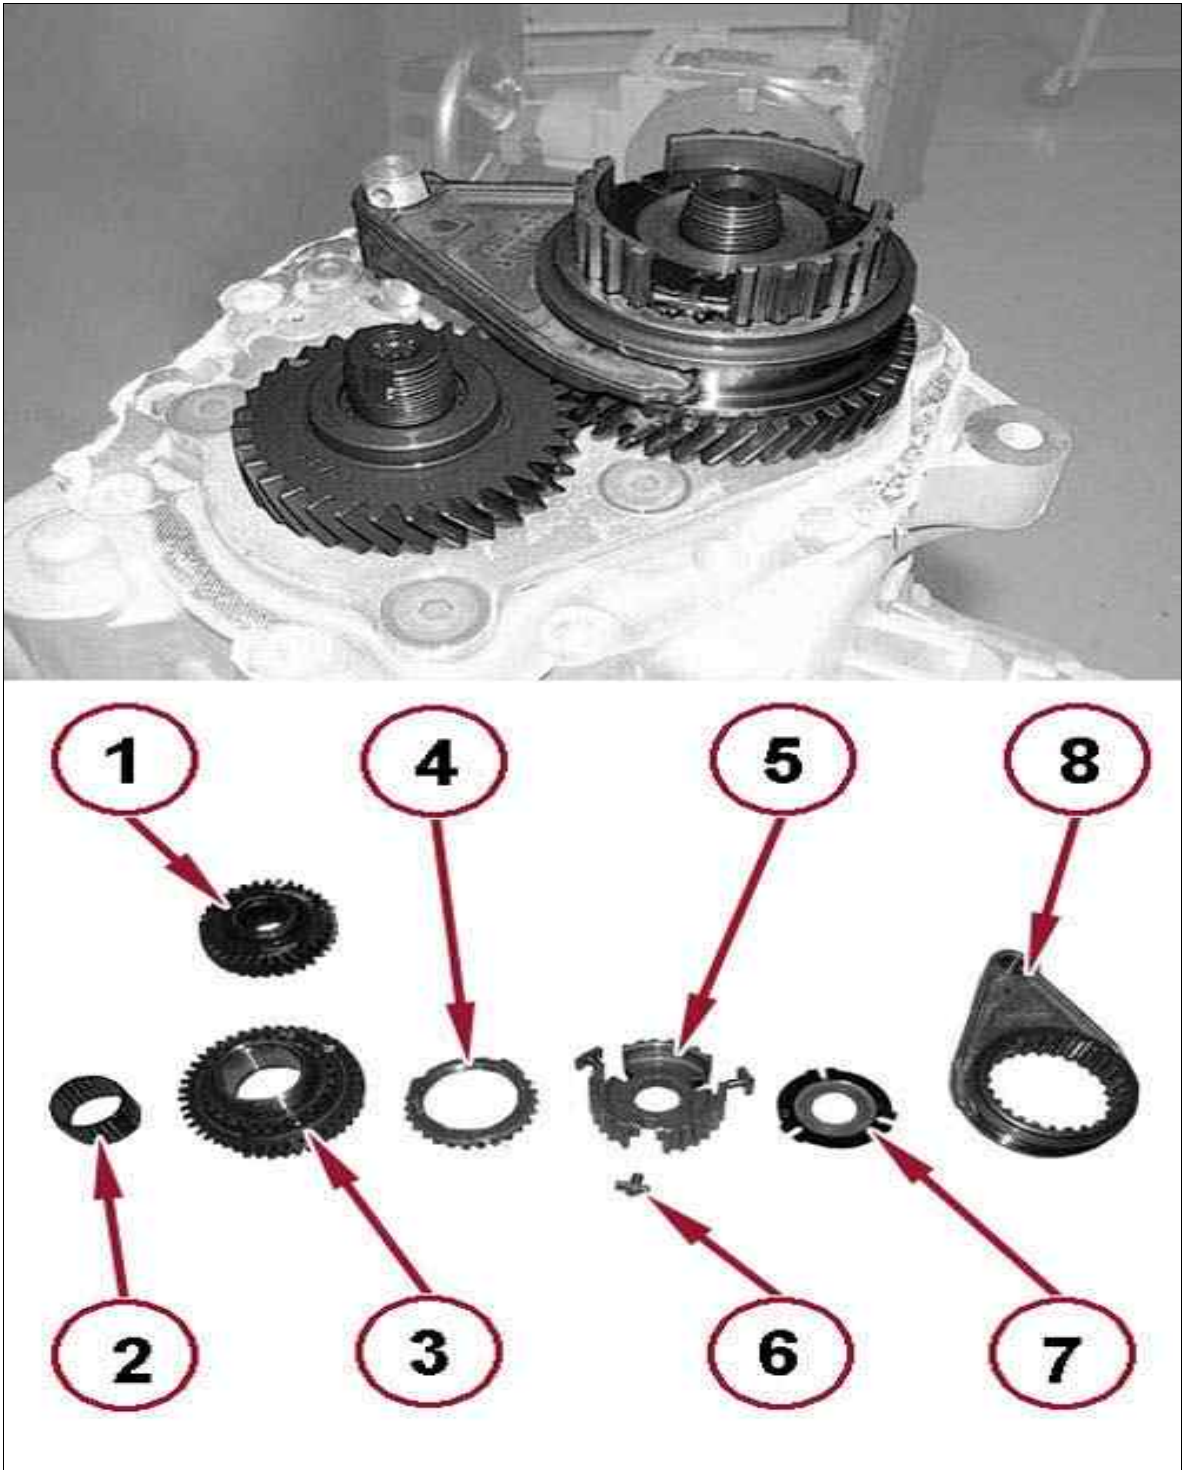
5th Gear Synchronizer Sleeve & 5th Gear Shift Fork
